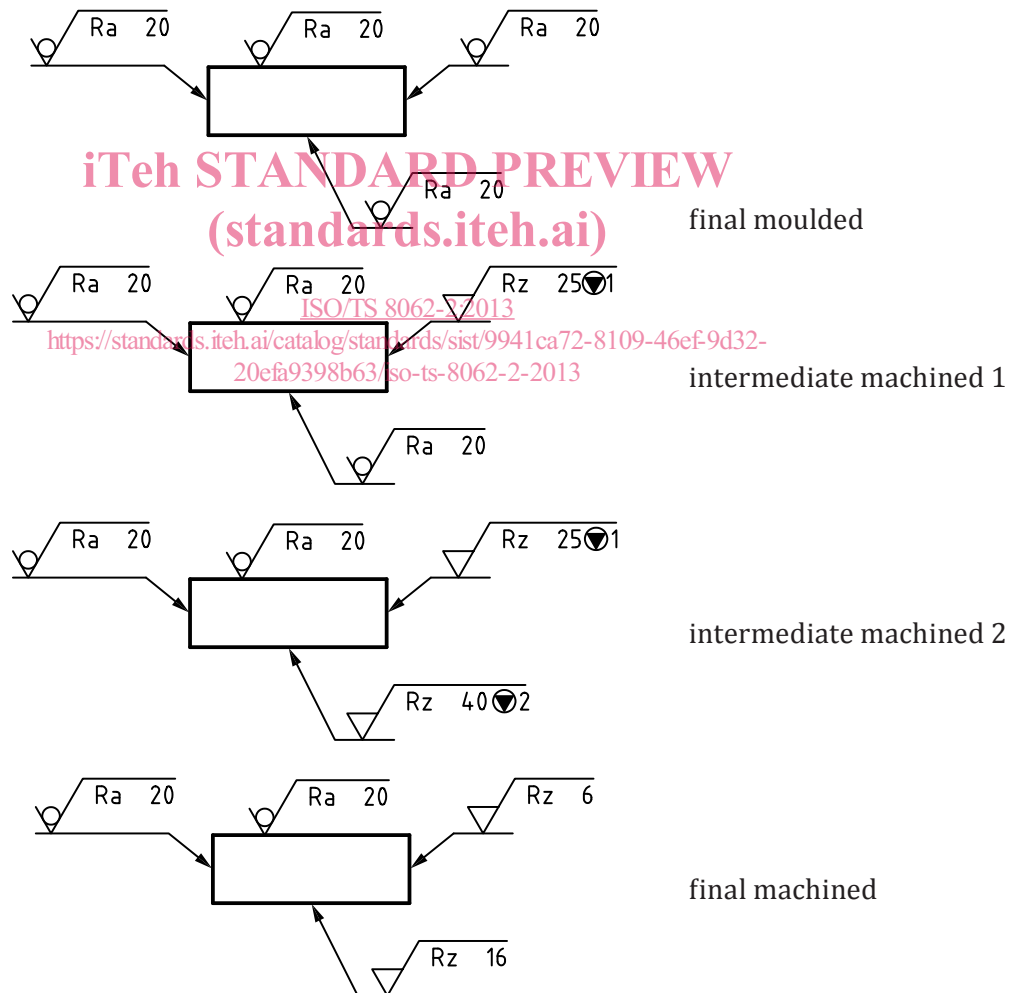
Example of a surface texture indication on a combined drawing and its interpretation
